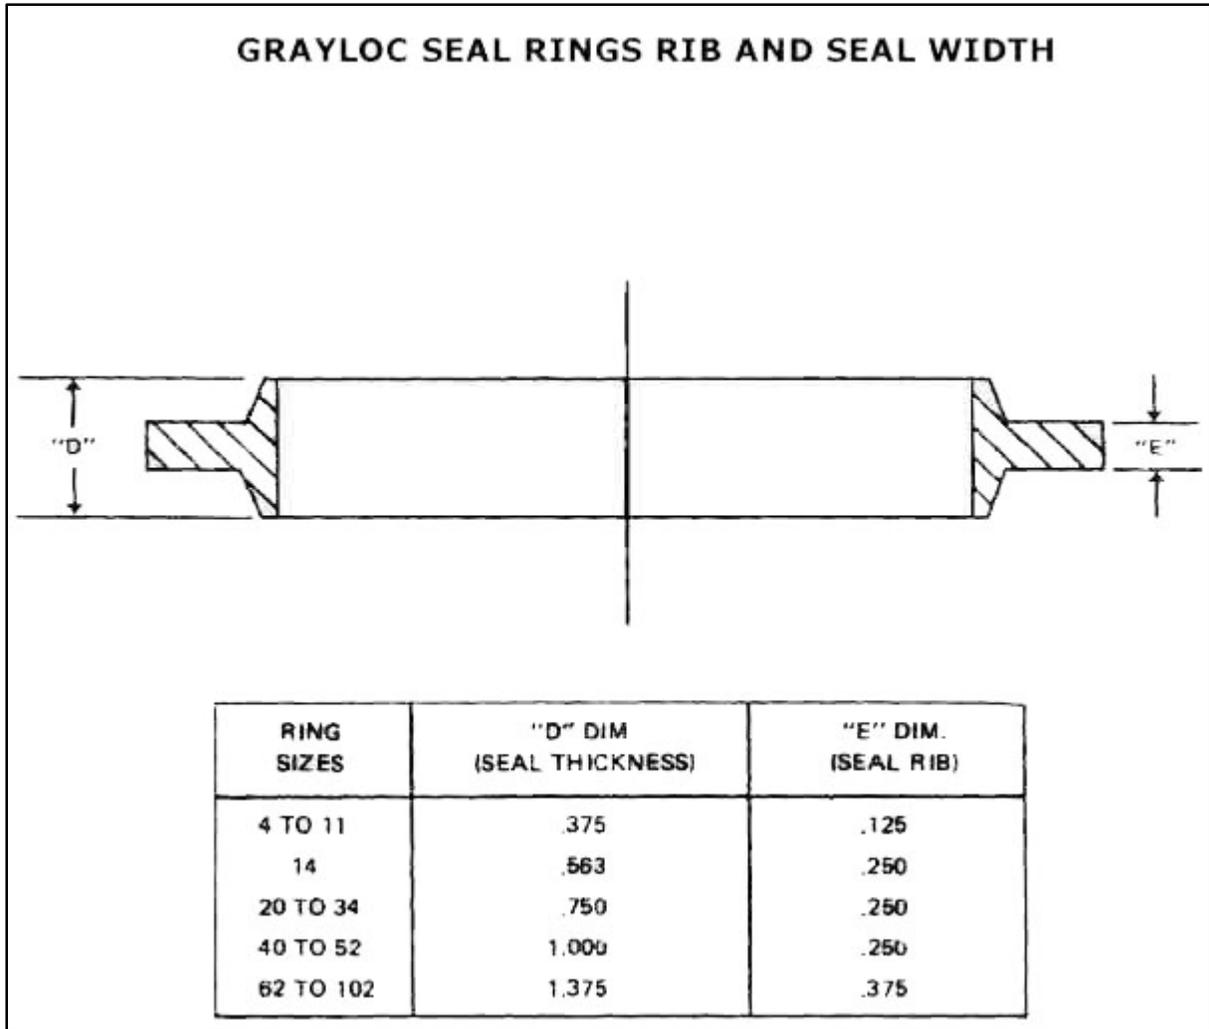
Grayloc Seal Rings Rib and Seal Width
